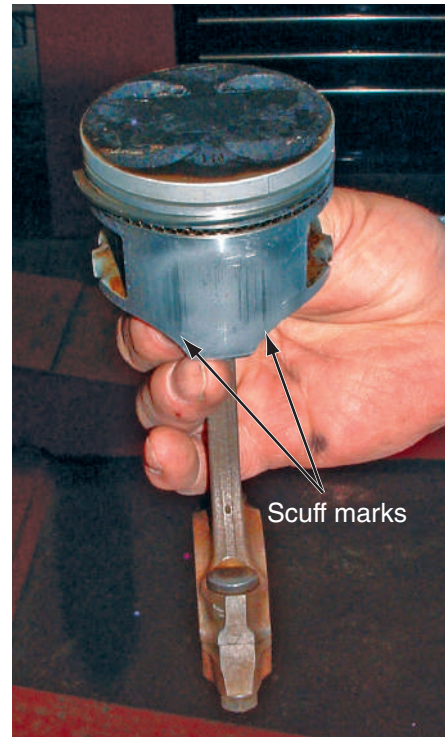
Each piston should be carefully checked for scuffing on the sides of the piston.
